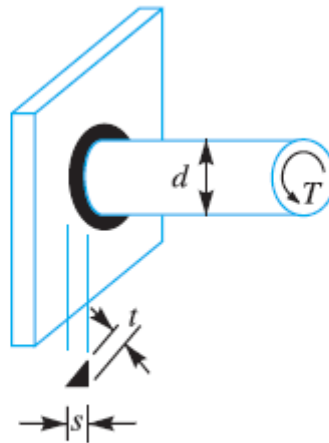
Circular fillet weld subjected to torsion.
